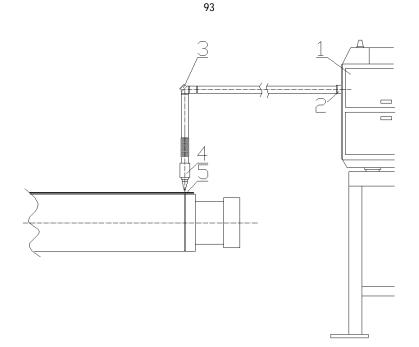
Schematic layout of laser cutting system for edge trimming (one cutting area).
